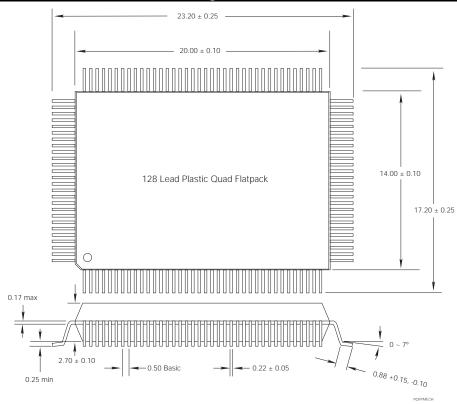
128 pin PQFP Package Mechanical Dimensions
